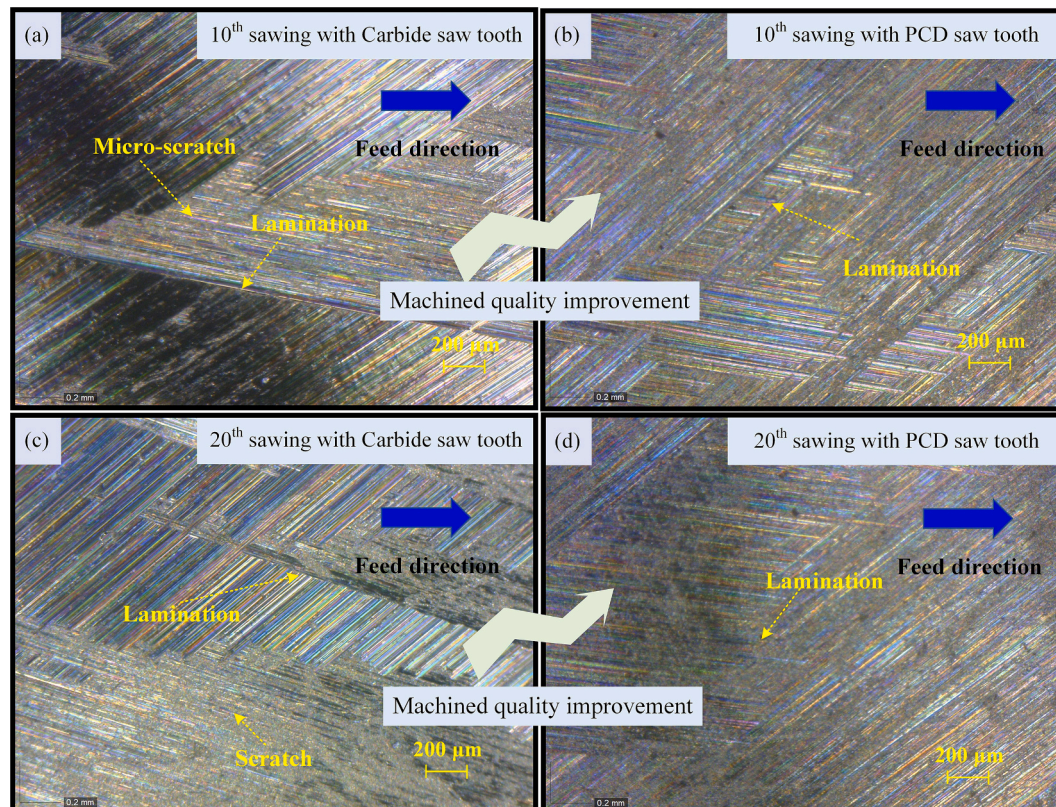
Qualities of the machined surfaces with carbide and PCD circular saw blades (the 10th and 20th sawing).
